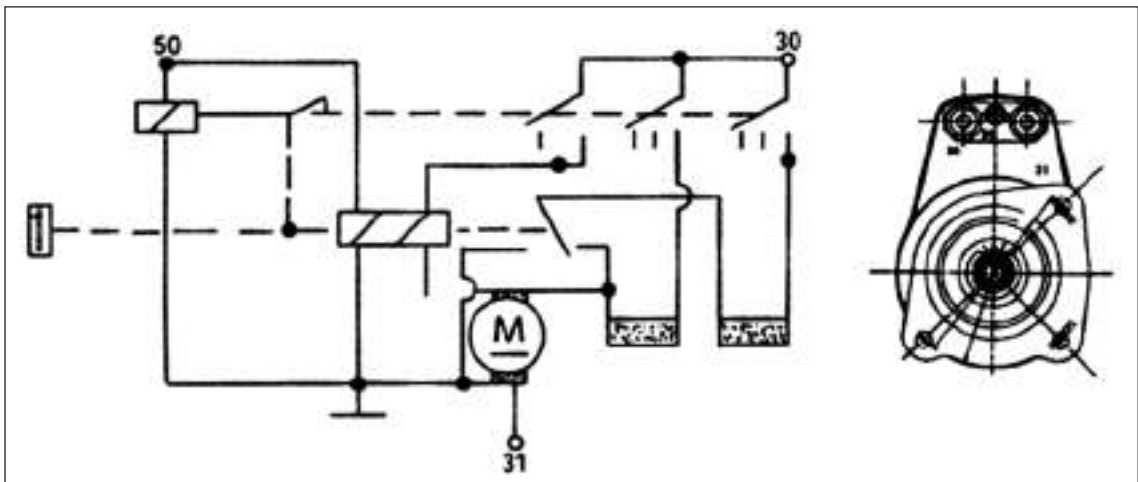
circuit diagram of starter    Figure 7-18 outline drawing of starter
